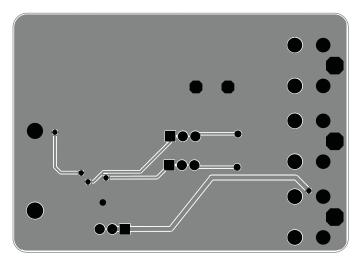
AHK32961DH Evaluation Board Bottom Side Layout.
